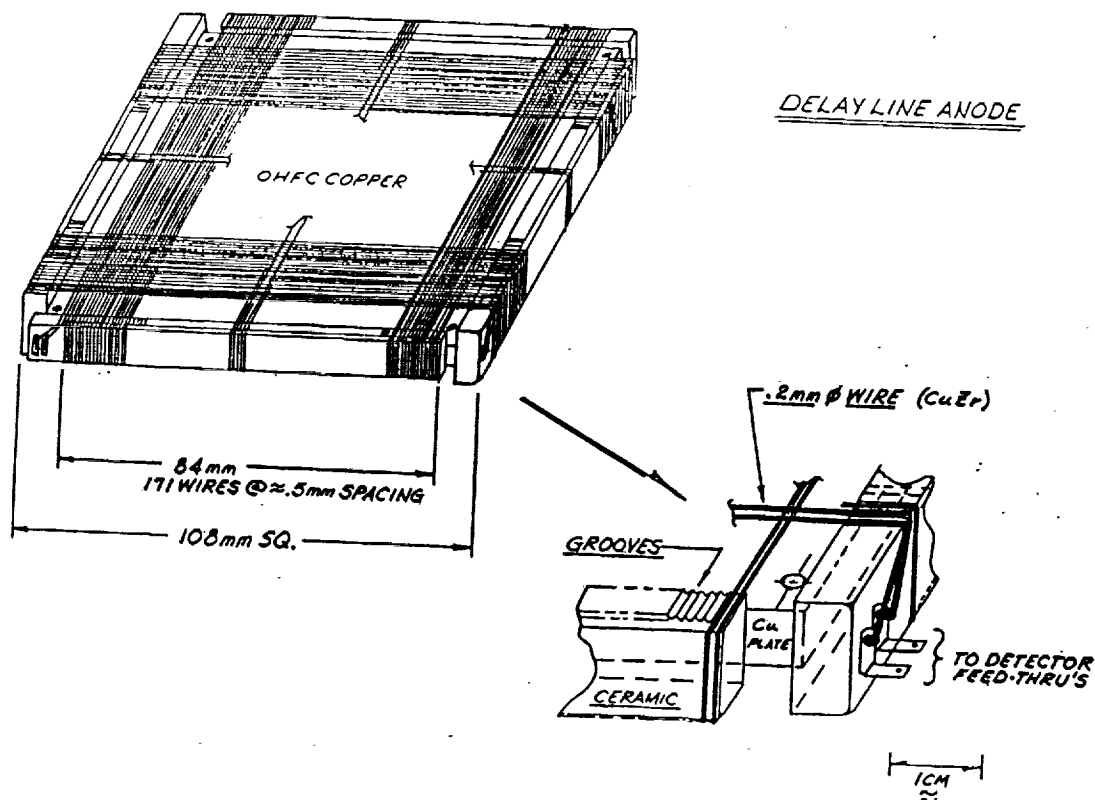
HDL2 prototype helical-delay line anode, showing a detail of wire positioning grooves and wire end attachment
